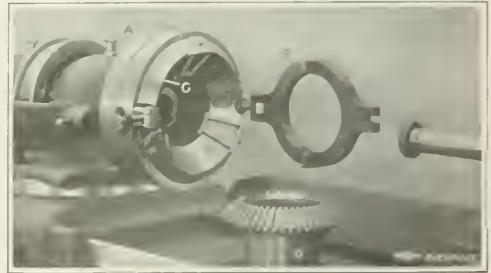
Satisfactory Type of Chuck for holding Bevel Gears when grinding Hole
